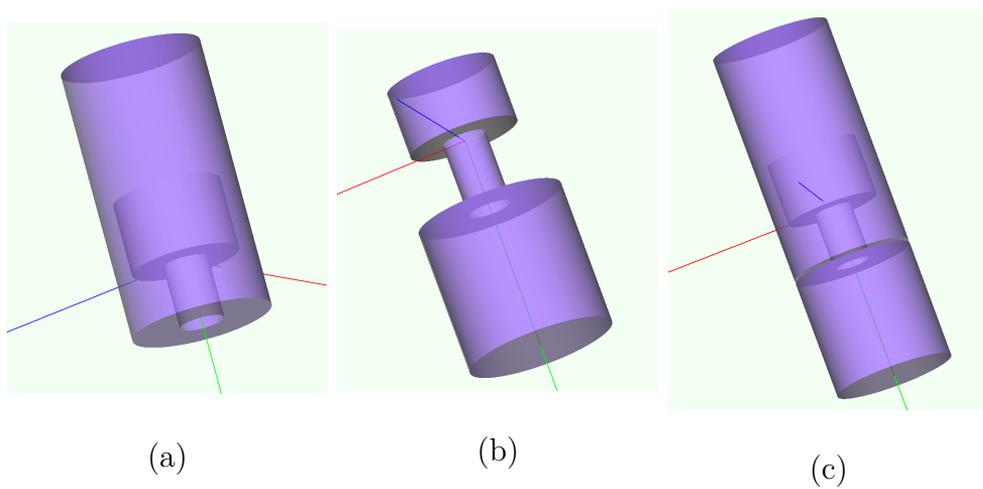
Pivot joint: (a) top part, (b) bottom part, and (c) combined.
